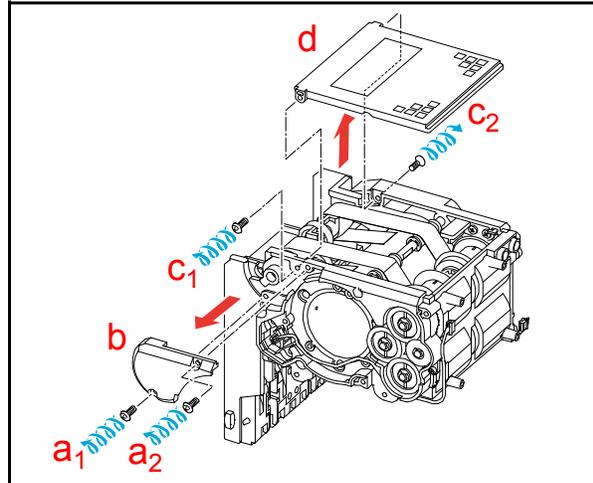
Rubber Pulley and Drive Roller Removal
